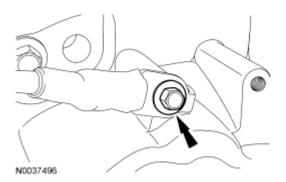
Locating Ground Wire Bolt Courtesy of FORD MOTOR CO.
